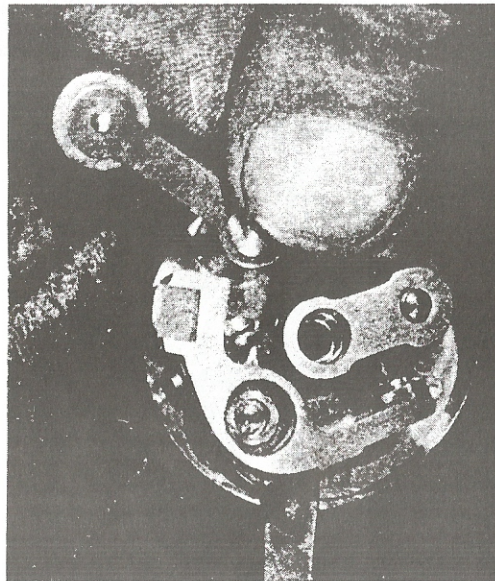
A QUICK METHOD OF EXAMINING THE FACE OF CONTACT POINTS IS TO TURN RETAINING SPRING AND PRISE ROCKER ARM OFF THE BUSH.
